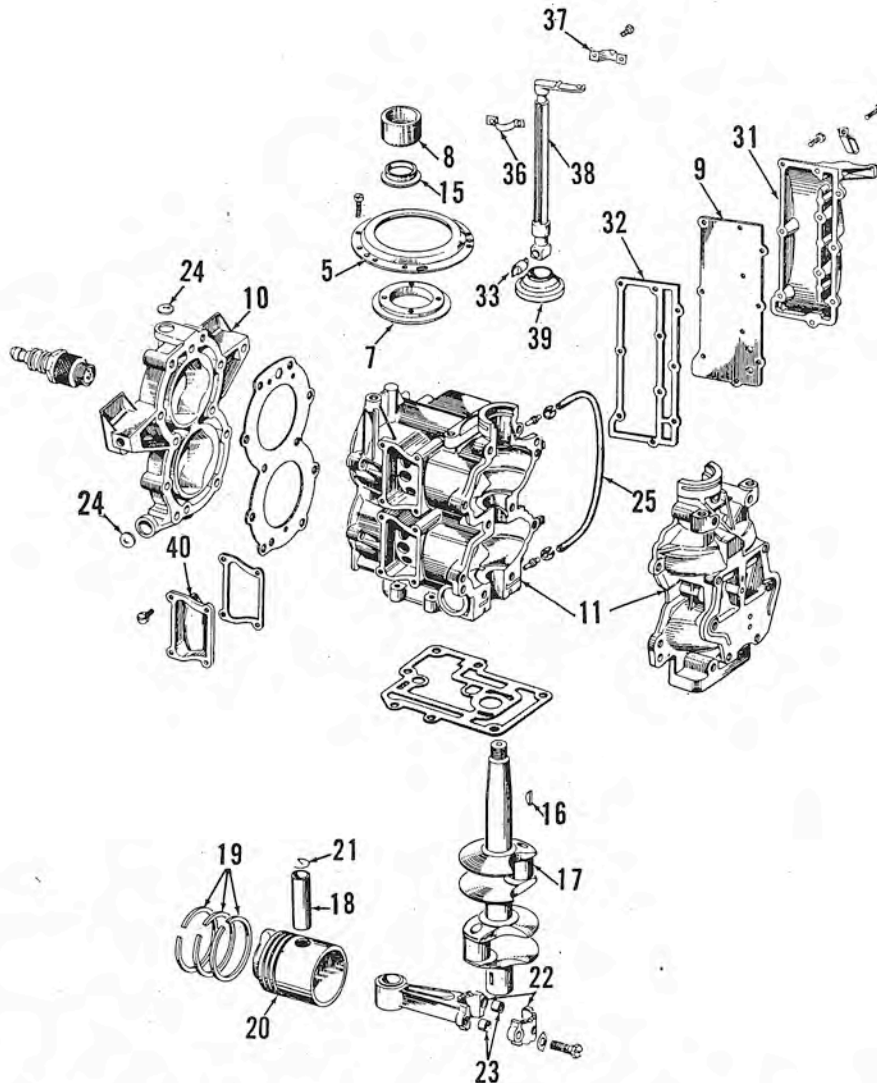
Exploded view of series AD power head assembly. Tube (25) directs excess oil that has drained to bottom crankcase, up to top main bearing to provide lubrication. Refer to legend under Fig. J17 except for (40), which is one of the two transfer passage covers.
